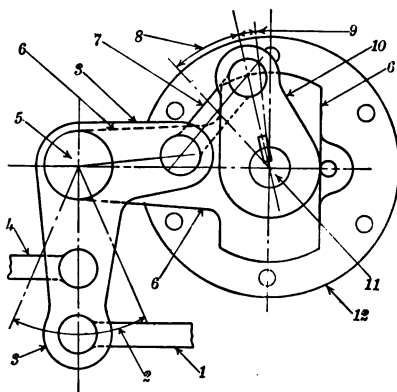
MECHANISM SURROUNDING EXHAUST-VALVE STEM
